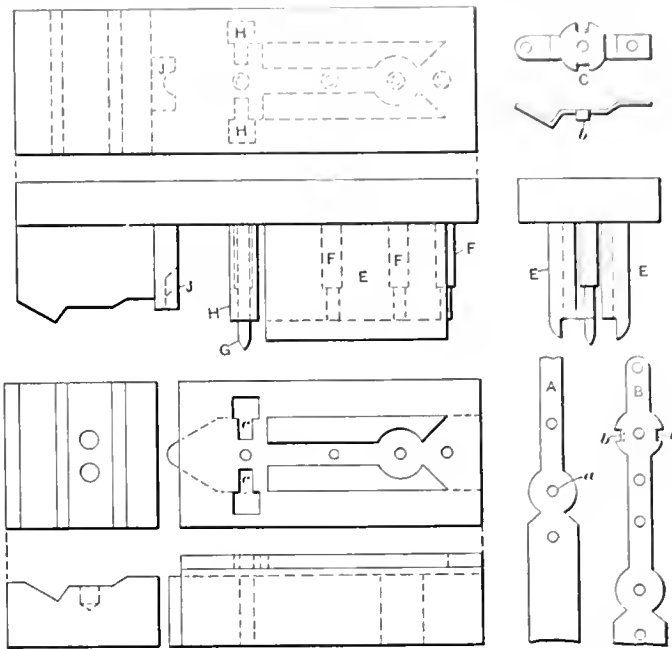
Diagrammatical View of Blanking and Forming Die for Producing the Piece shown at C
